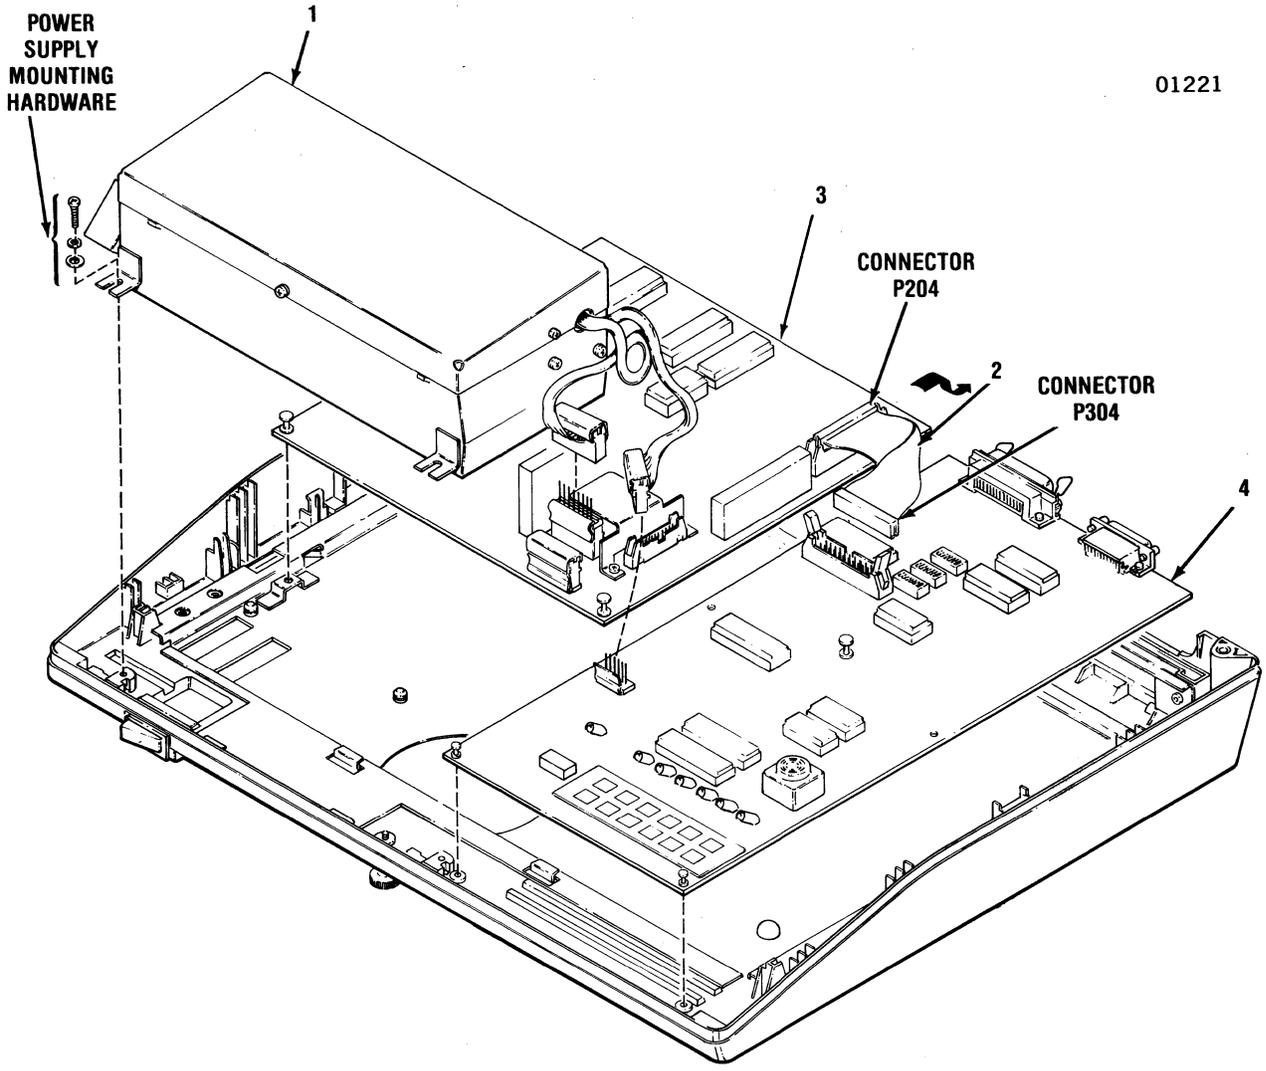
REMOVAL/REPLACEMENT POWER SUPPLY ASSEMBLY, FORMAT/CONTROLLER CABLE PRINT CONTROLLER PCB AND FORMAT CONTROLLER PCB
